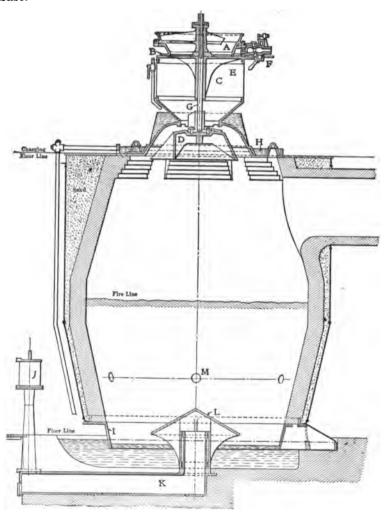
Section of Morgan Gas-Producer Equipped with Bildt Automatic Feed.
